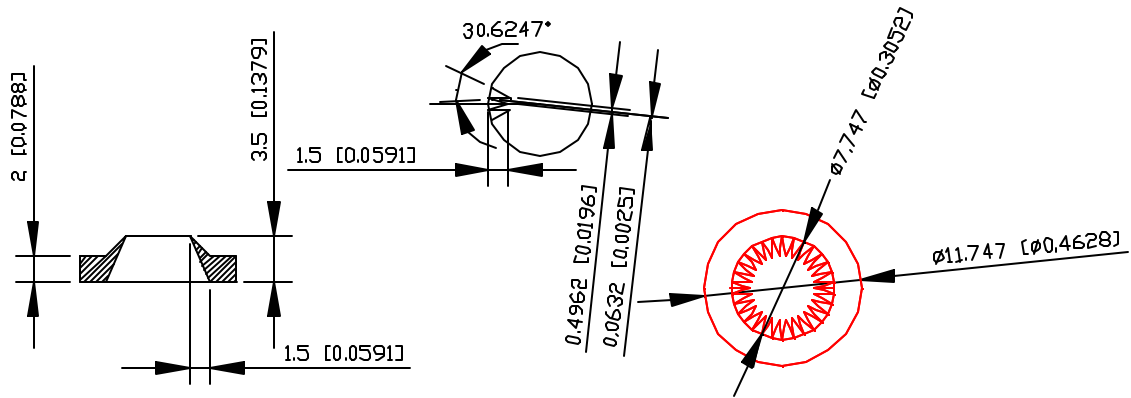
CAD drawing of the emitter (dimensions in mm [inches])
